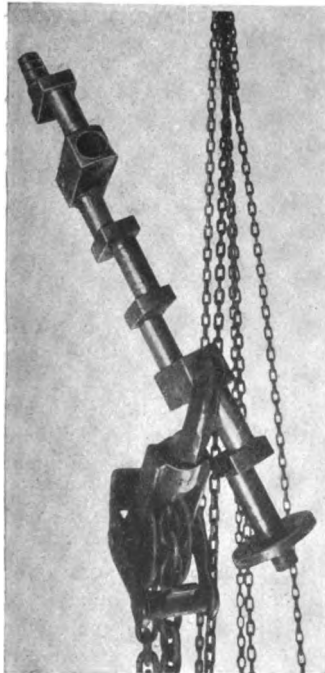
Somewhat of a freak design, this crankshaft being designed for a motor no larger than that of Fig. 1.
